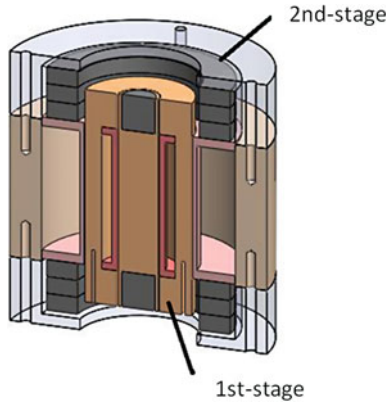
Schematic layout of the proposed two-stage, large-stroke linear motor
